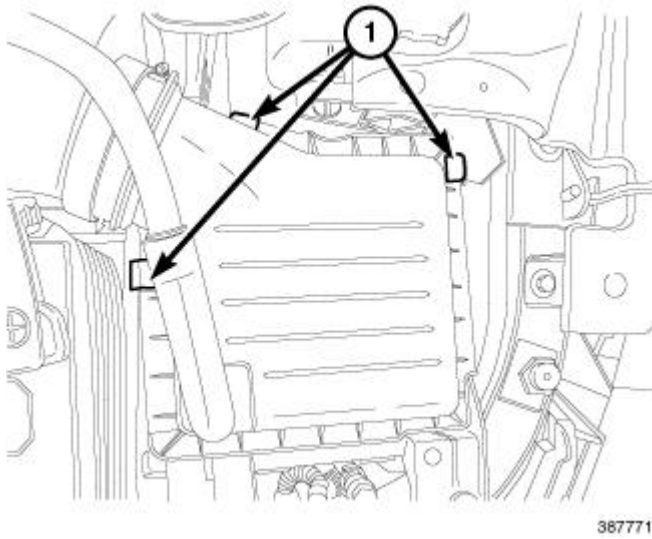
Air Cleaner Housing Cover Retaining Clamps
